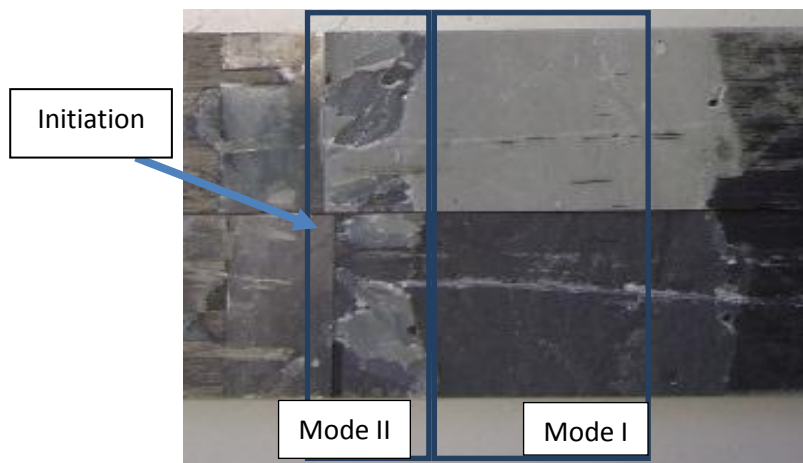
Fracture surfaces of the specimens tested with 50% of  $P_{max}$
